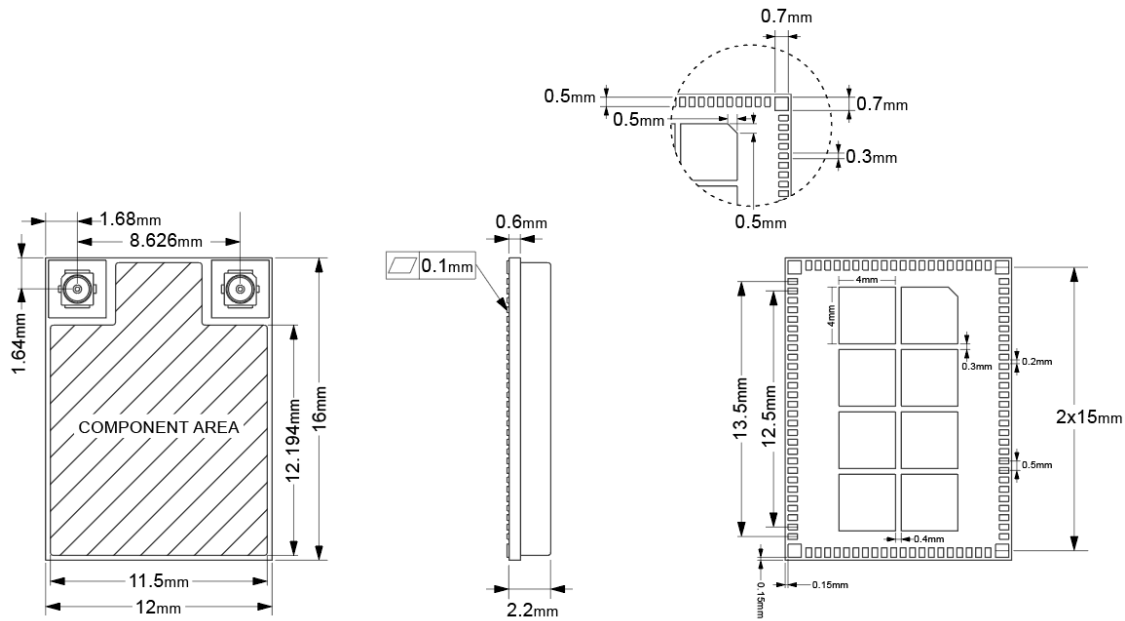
MQC2072 M.2 Soldered-down Type 1216 Module Dimension
